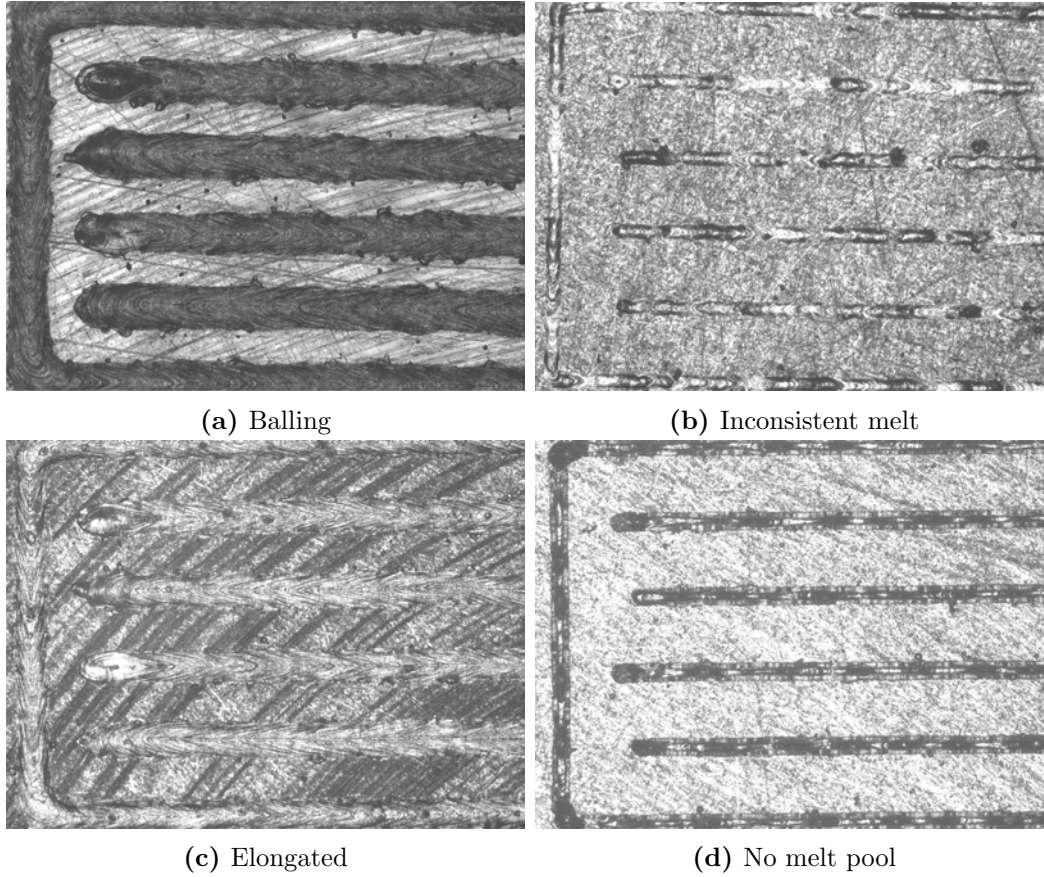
Representative images of different weld track surface quality flaws used to exclude settings.
